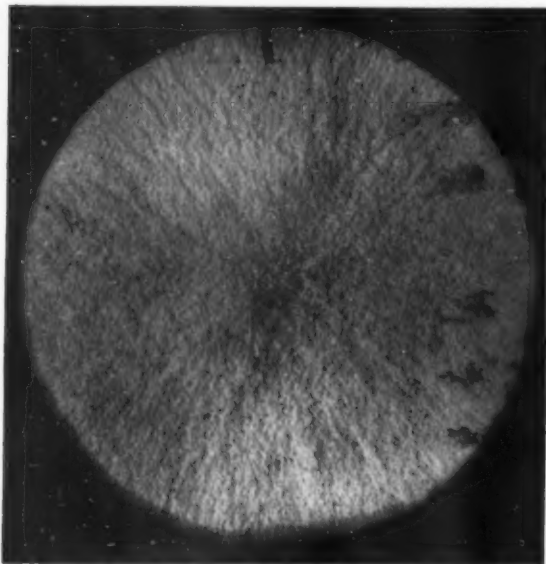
Typical fracture of a nickel-chromium chilled roll.
